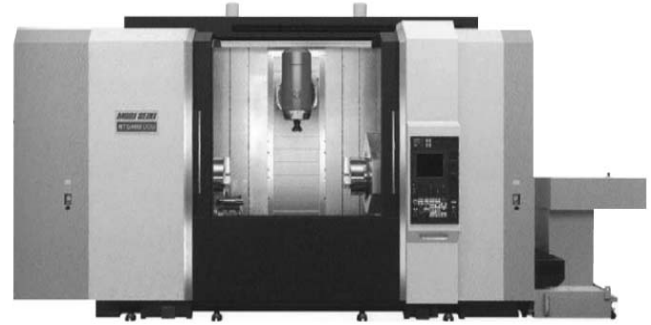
Combined multi-axis machine tool (Mori Seiki Co. NT5400DCG)
